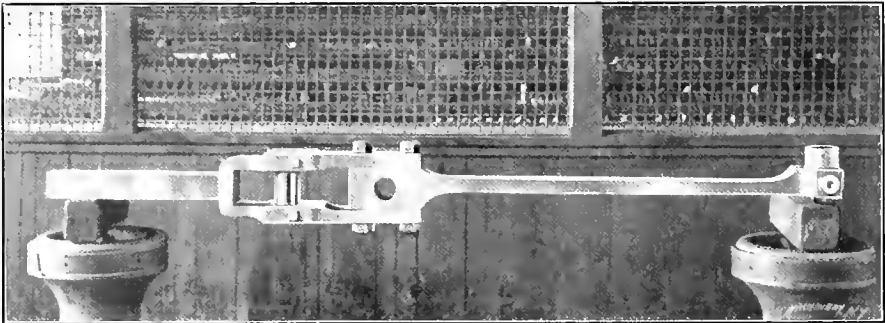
Radius Rod Extension with Slotting Complete—Assembled with Radius Rod
